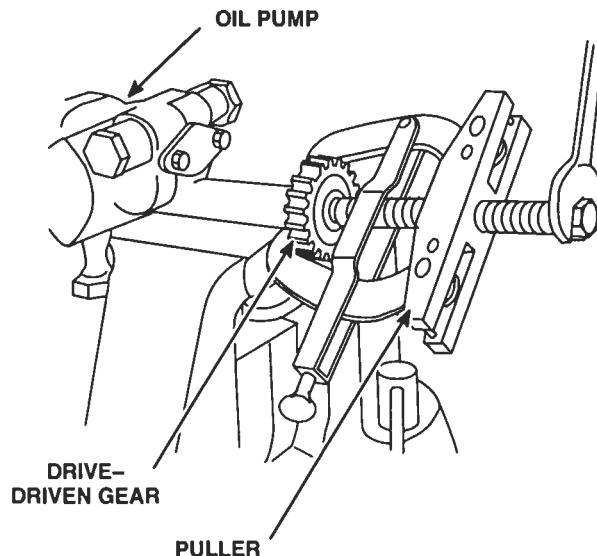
Removing Oil Pump Drive Gear from Shaft with Tool
